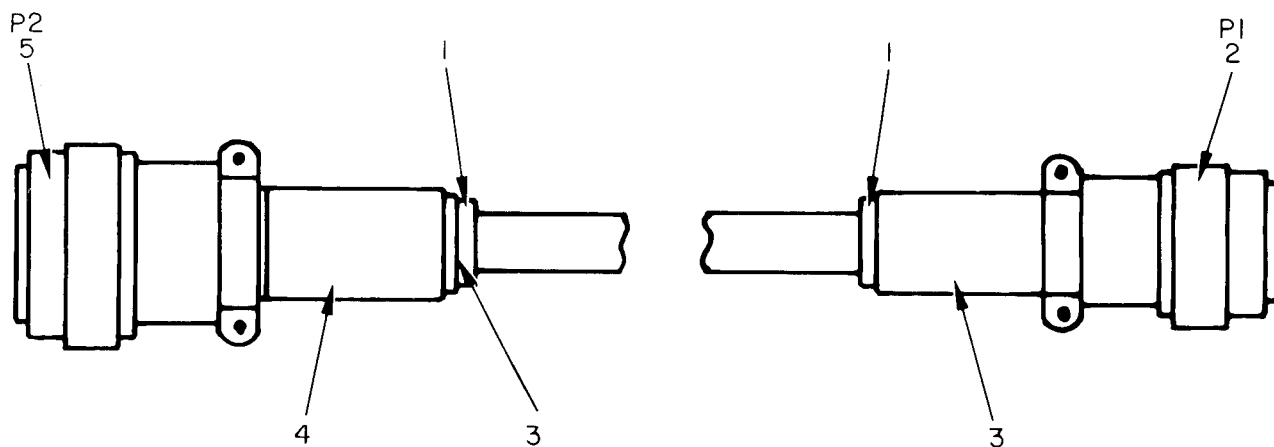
Cable Assembly, Special Purpose, Electrical CX-11045/URM-157.
